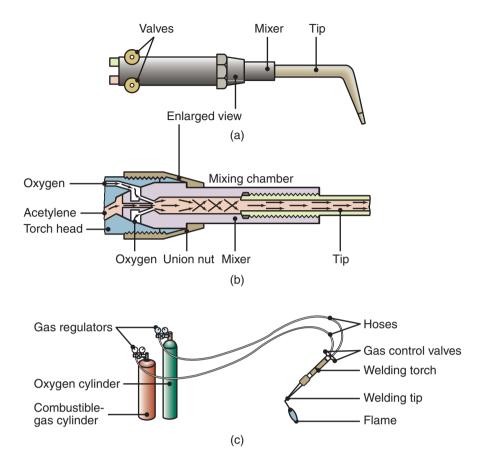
(a) General view of, and (b) cross section of, a torch used in oxyacetylene welding. The acetylene valve is opened first. The gas is lit with a spark lighter or a pilot light. Then the oxygen valve is opened and the flame is adjusted. (c) Basic equipment used in oxyfuel–gas welding. To ensure correct connections, all threads on acetylene fittings are left handed, whereas those for oxygen are right handed. Oxygen regulators usually are painted green and acetylene regulators red.
